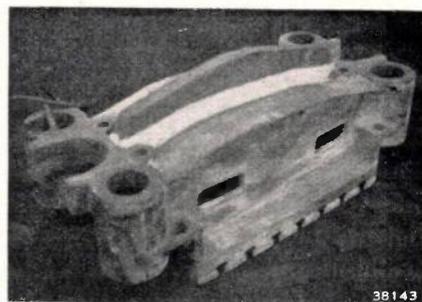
Head of the press of fig. 8 with welded reinforcing plate.
